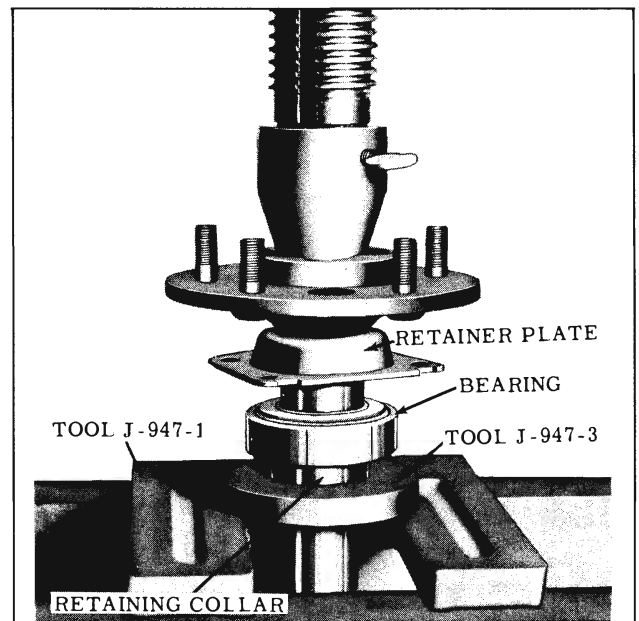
Installing Axle Shaft Bearing Retainer
